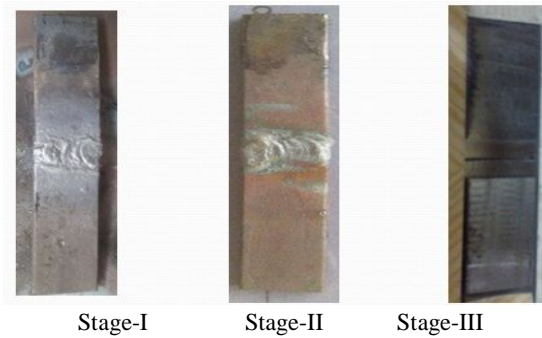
Weld Bead in Different Stages of Experiments
